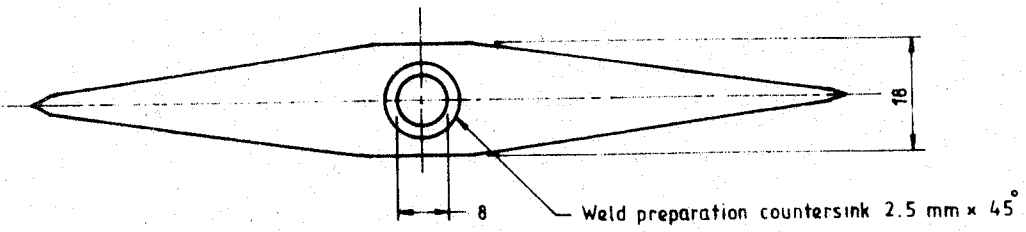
(a) - Dimensions of welder's chipping hammer
